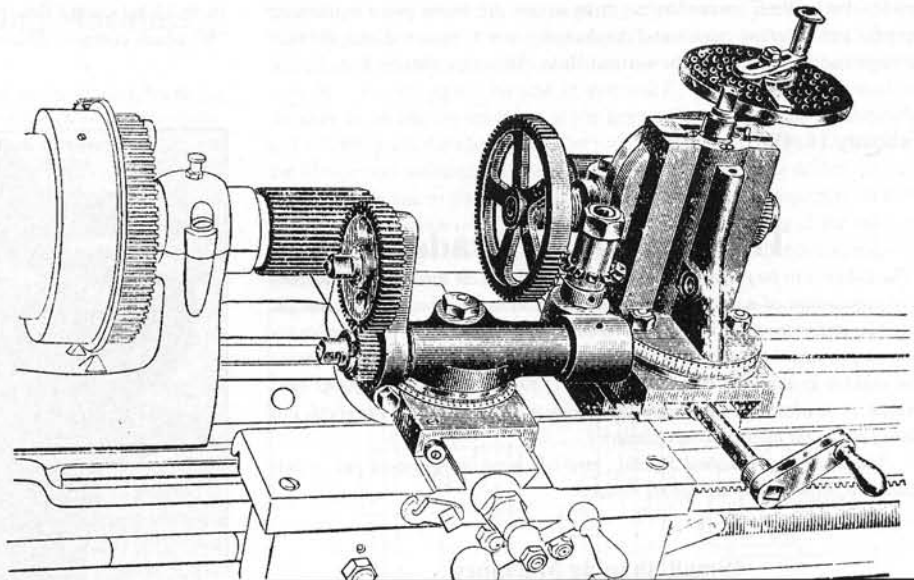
Wheel Cutting Device for "Star" Lathes.
